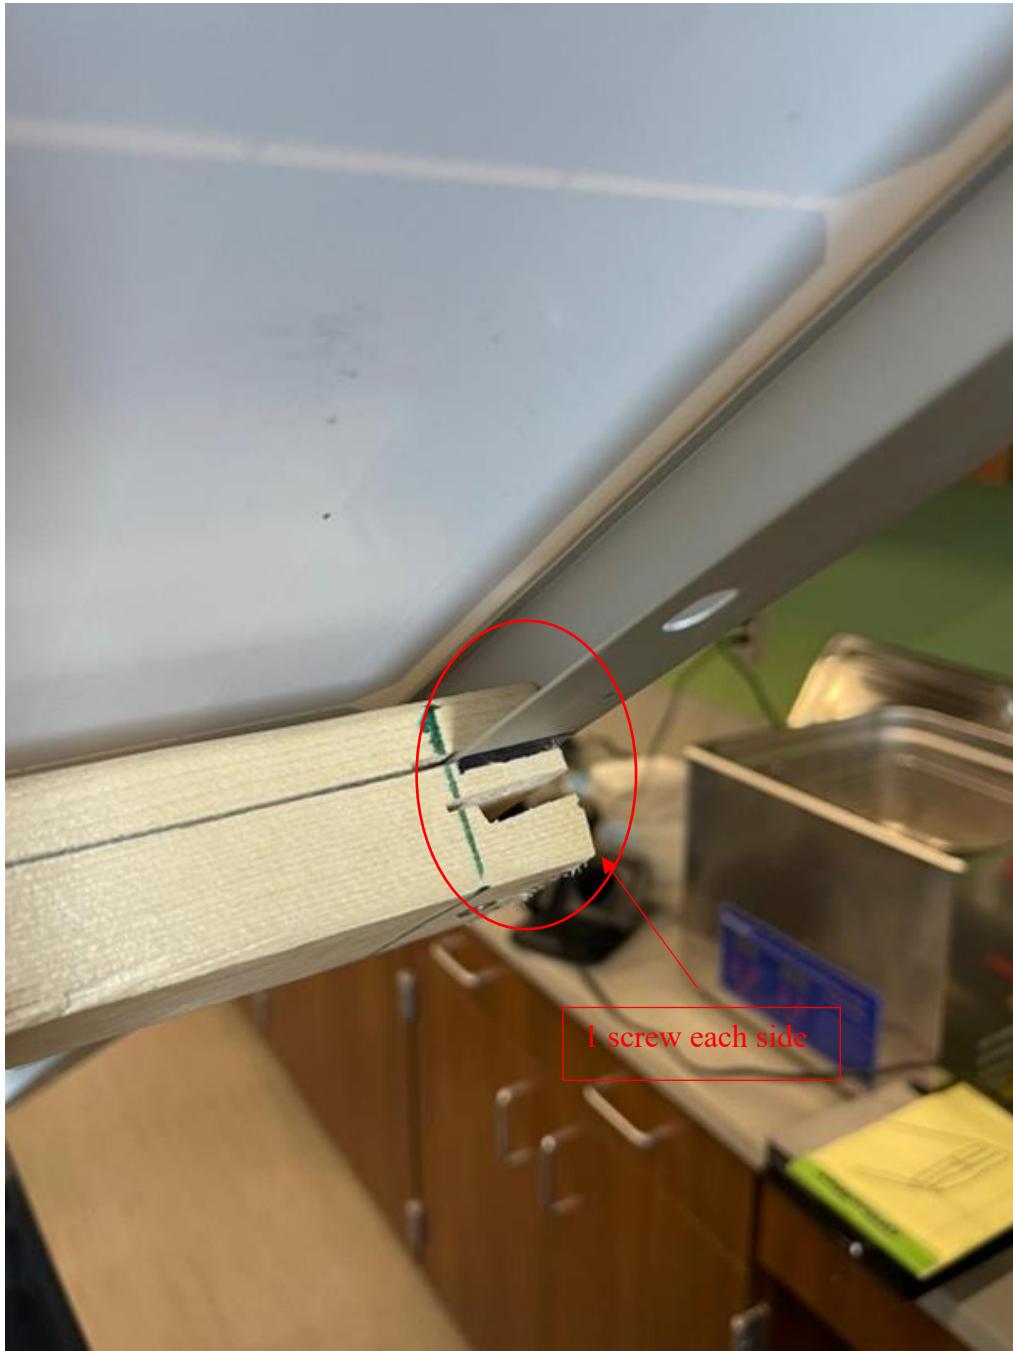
Horizontal wood plank is slid in the groove and mounted to the solar panel using 1 screw on each side
